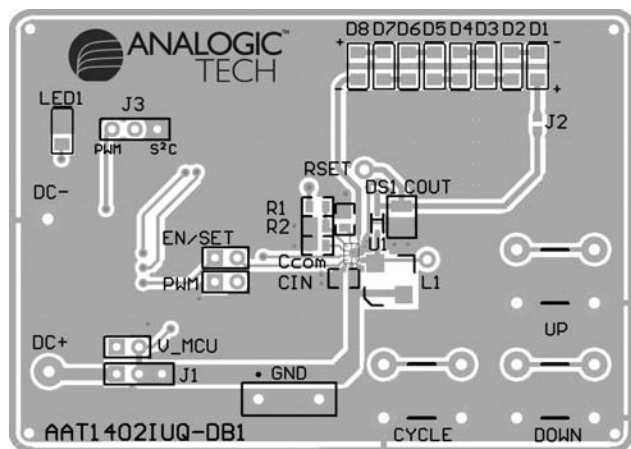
AAT1402 Evaluation Board Layout Top Layer.
